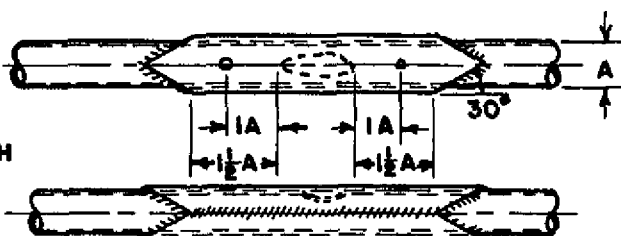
Members dented in a bay—repairs by welded sleeve.
